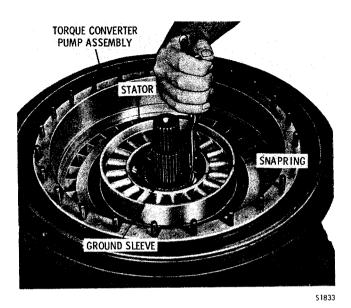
Removing stator snapring (TRT 4820 models)
